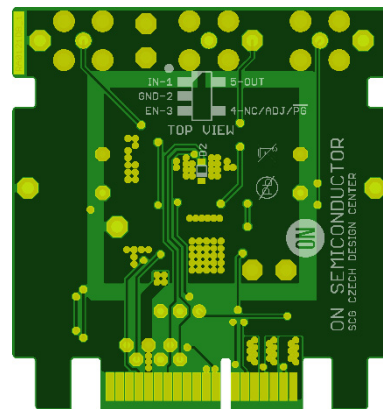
TSOP-5 Demo Board (2 layer, rev. 1) – PCB Bottom Layer
